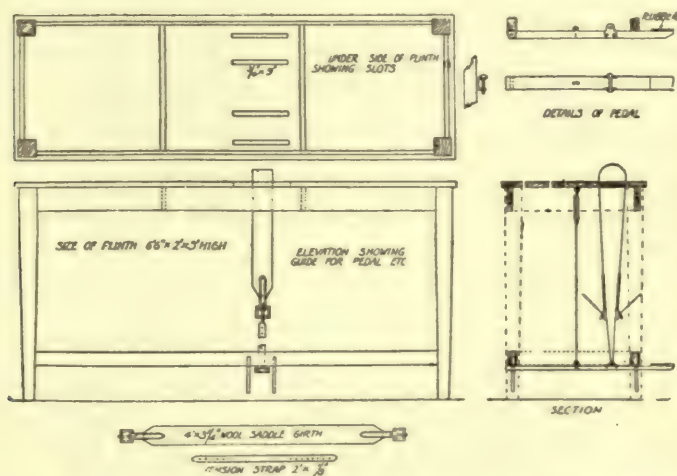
Detail drawing of table shown in use in Fig. 231.
